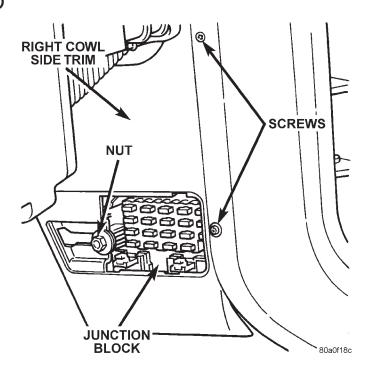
Right Cowl Side Trim Remove/Install HORN RELAY
